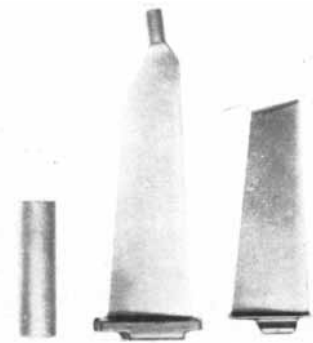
Example of titanium forging produced by the Tapco Group for use in jet engines. Shown left to right are the cut off slug, forged blade and finished blade.
